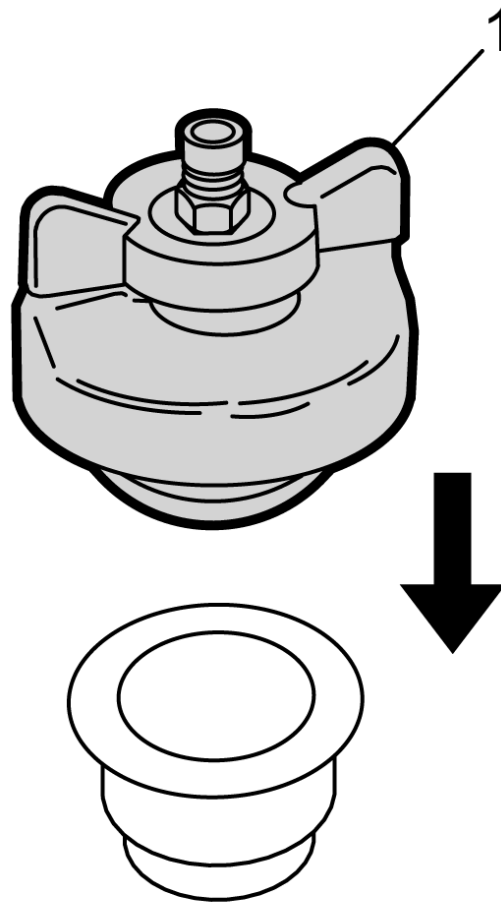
Radiator Cap & Surge Tank Test Adapter
